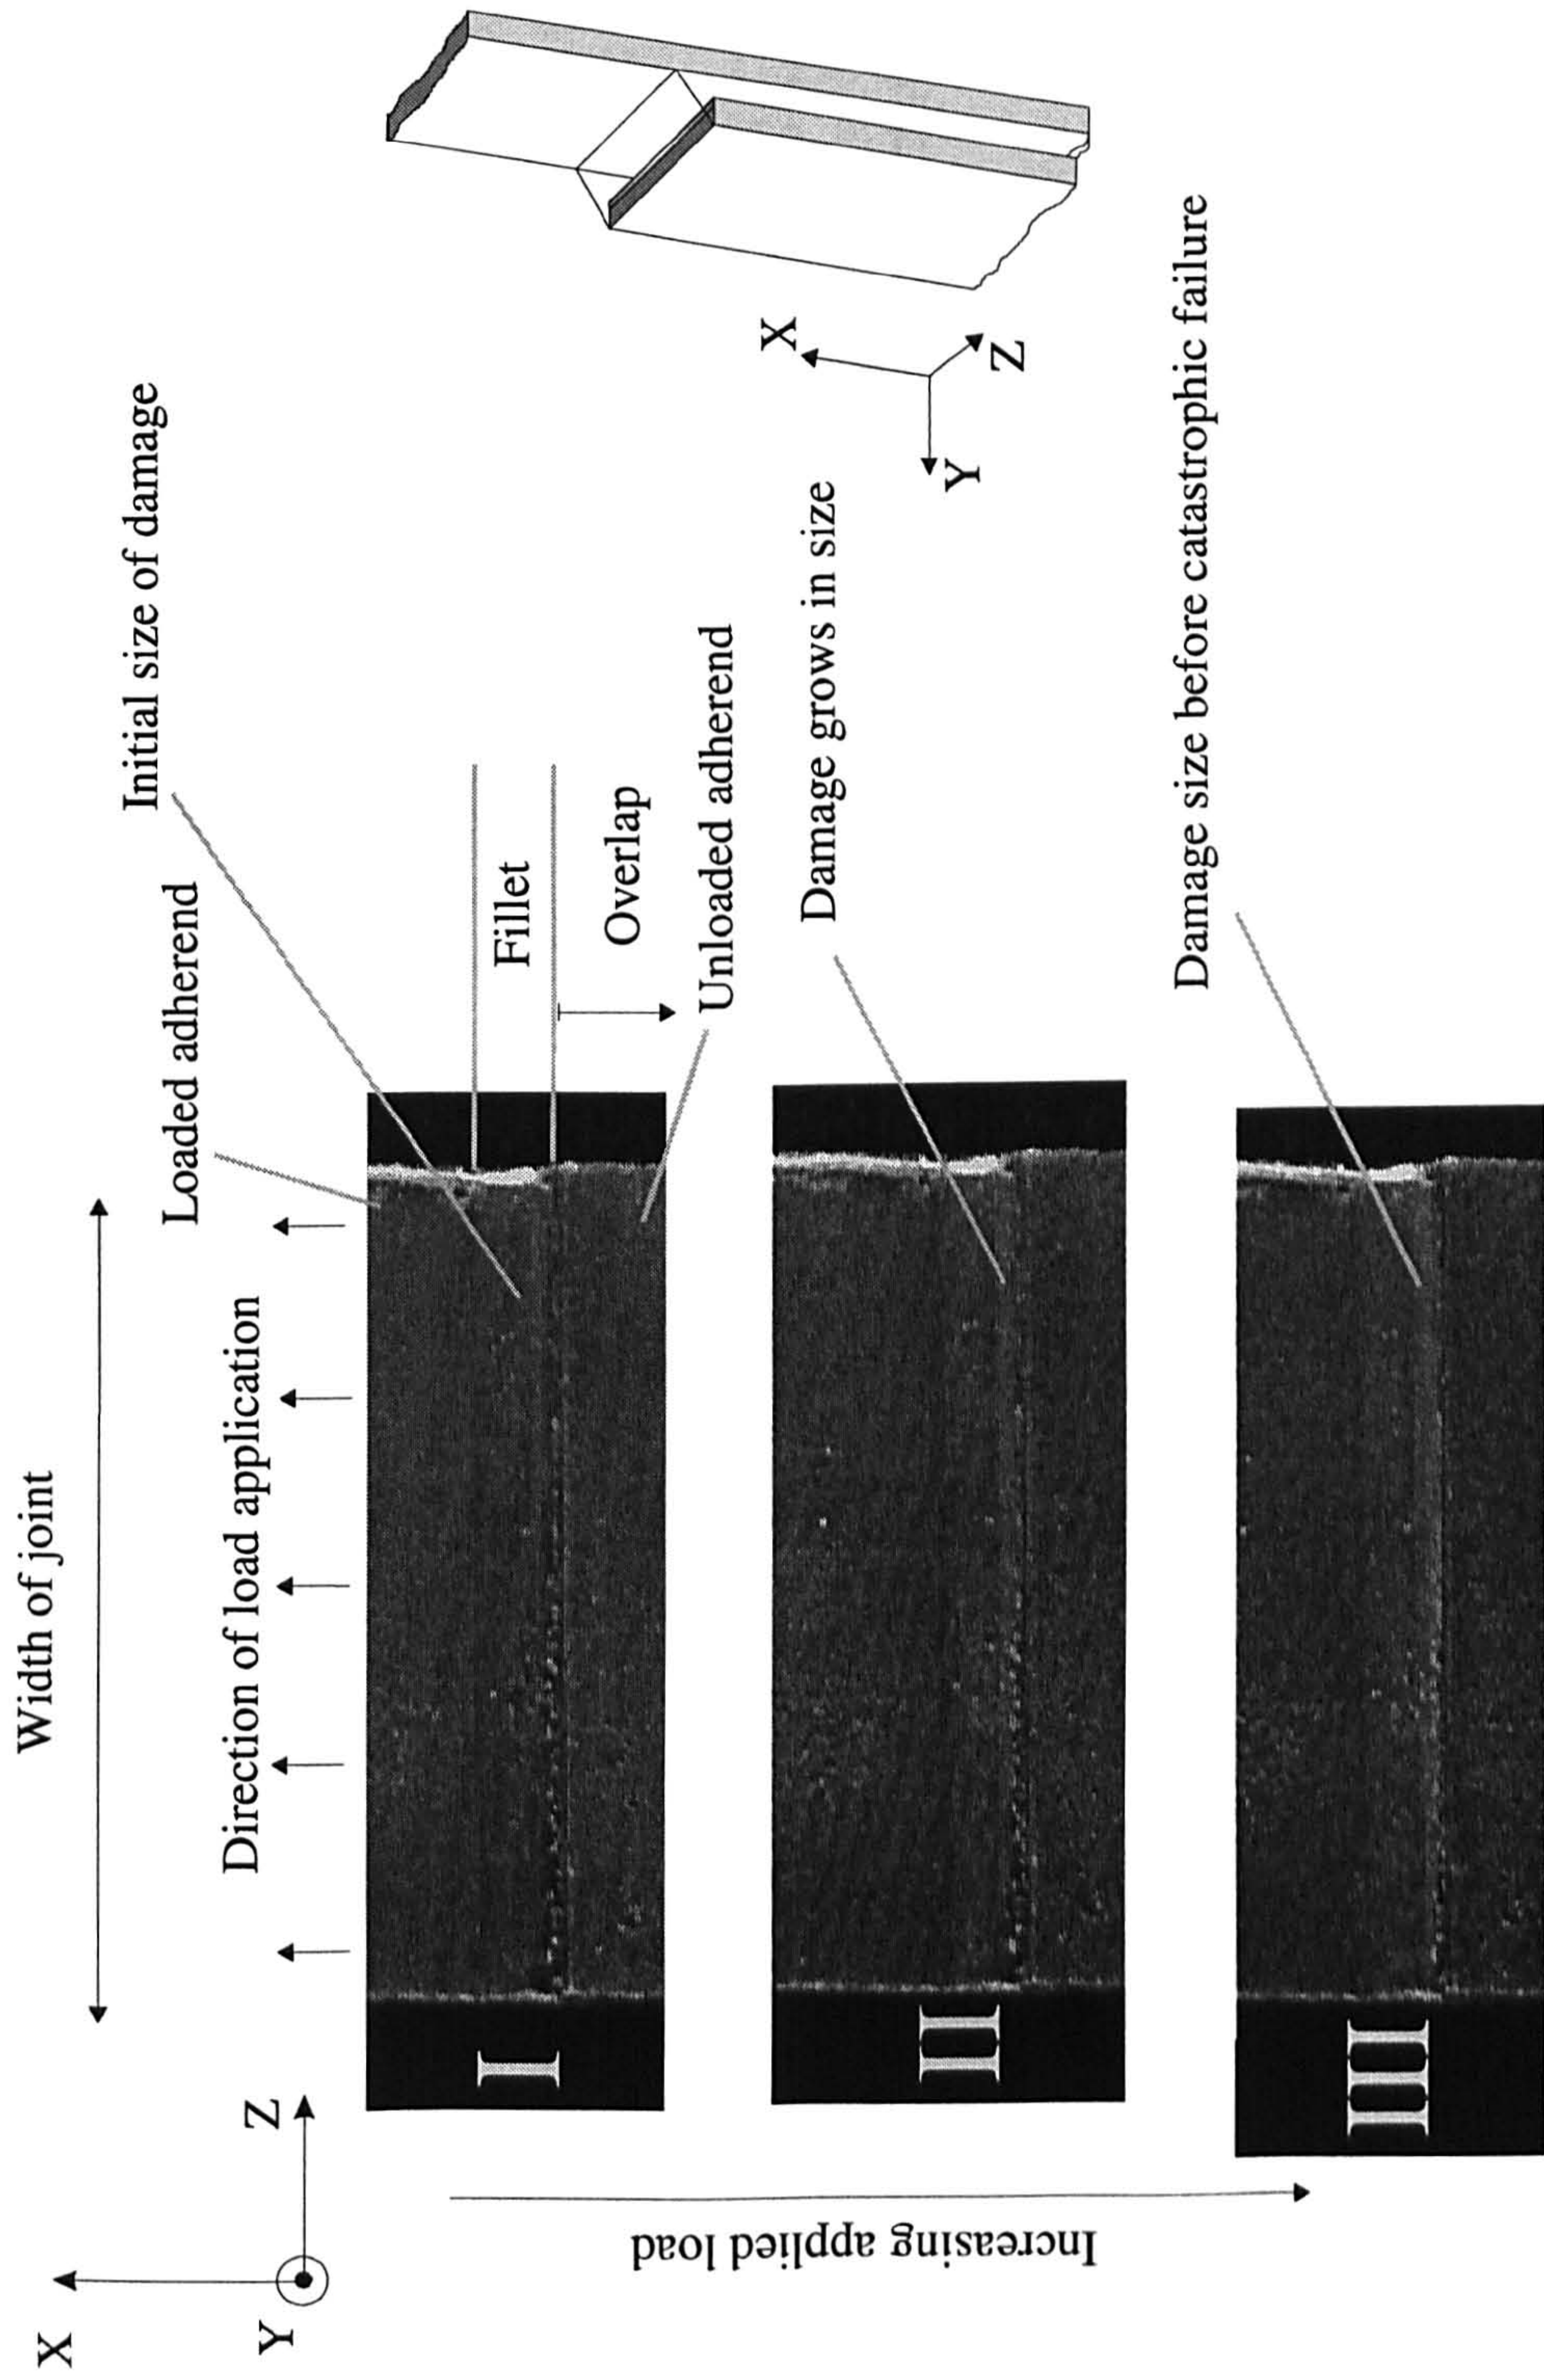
25 mm overlap joints with hard steel and MY 753 adhesive - detailed view of fillet face - damage growth next to adherends embedded corner - no visible cracks in the fillet.
